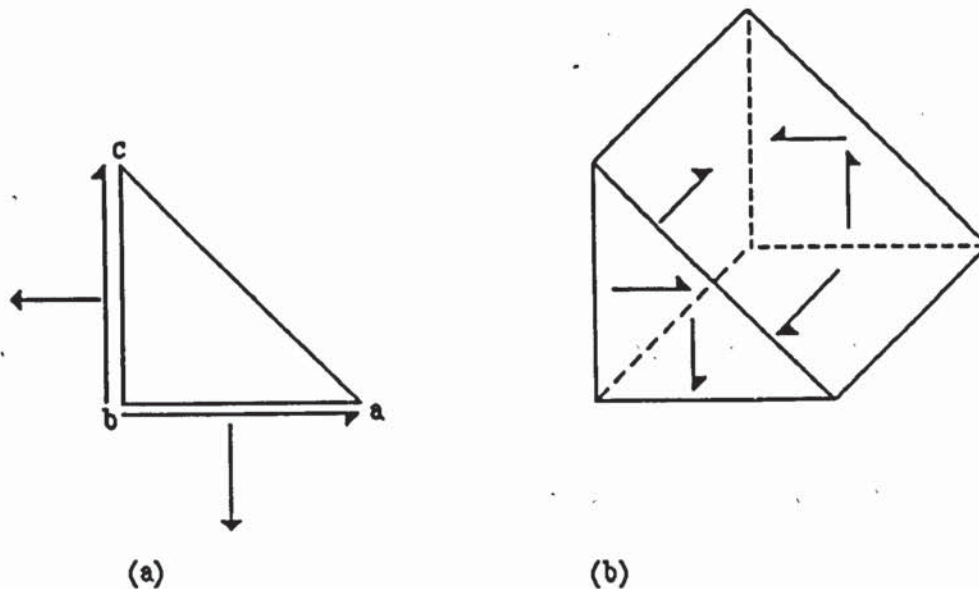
Kamtekar's equivalent force weld models (a) tensile fillet welds, (b) shear fillet welds.
